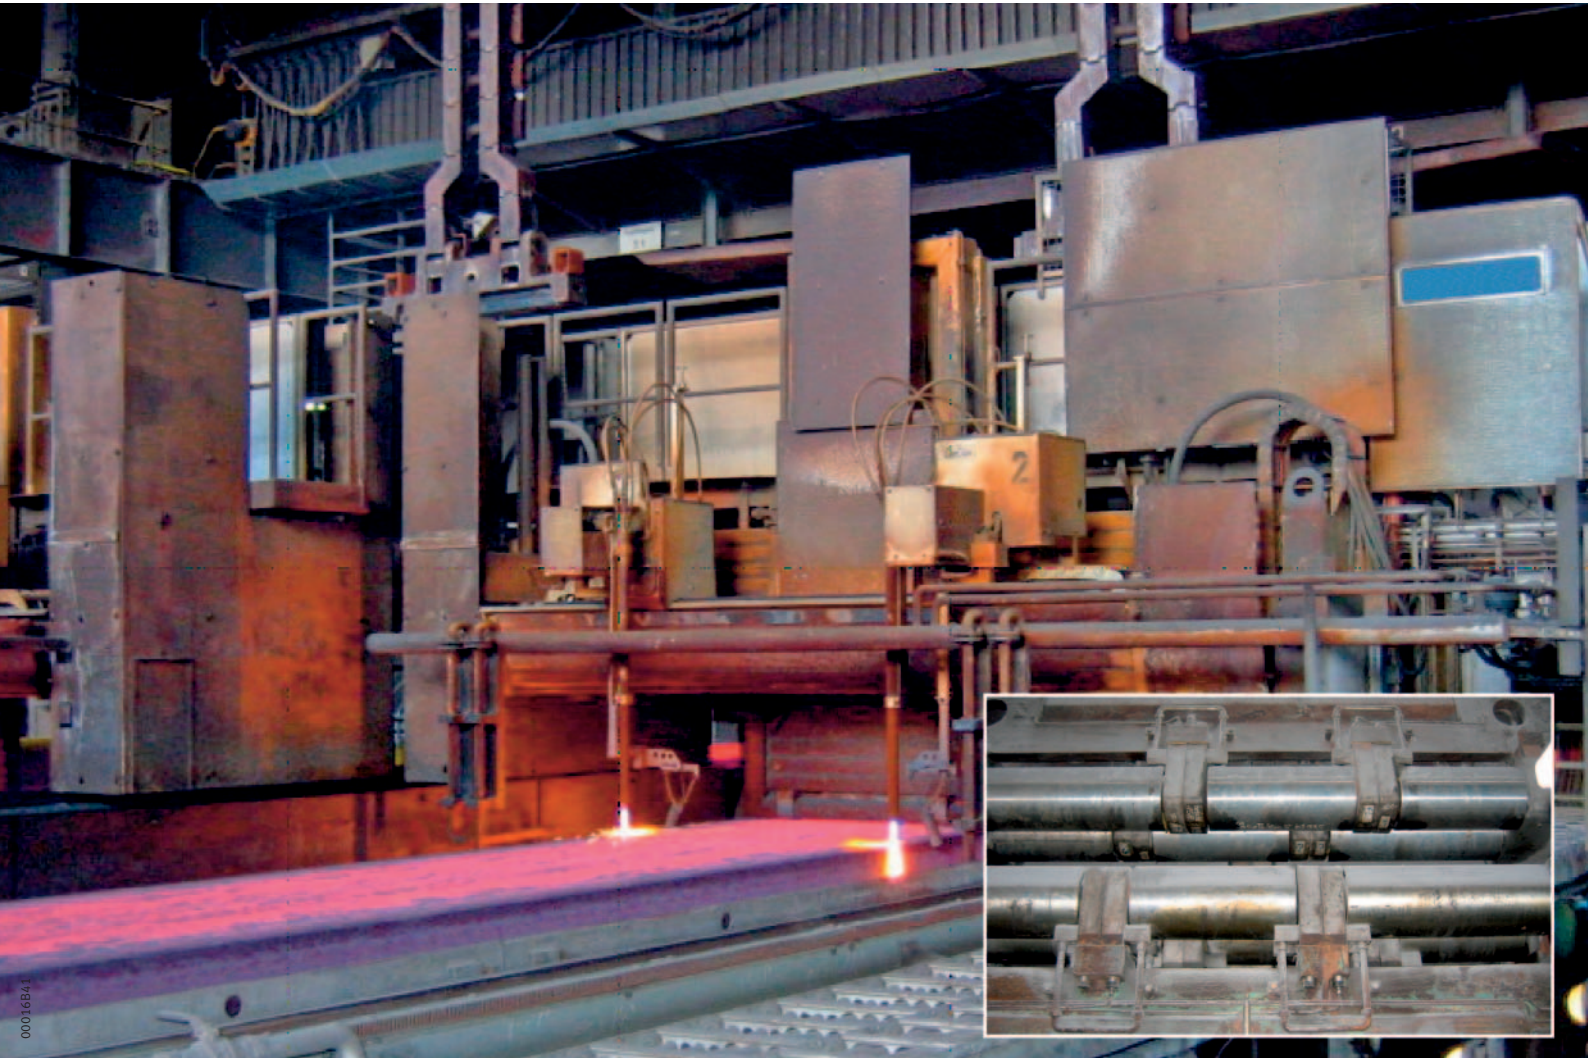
· Continuous Casting Plant 1 in Beckerwerth
